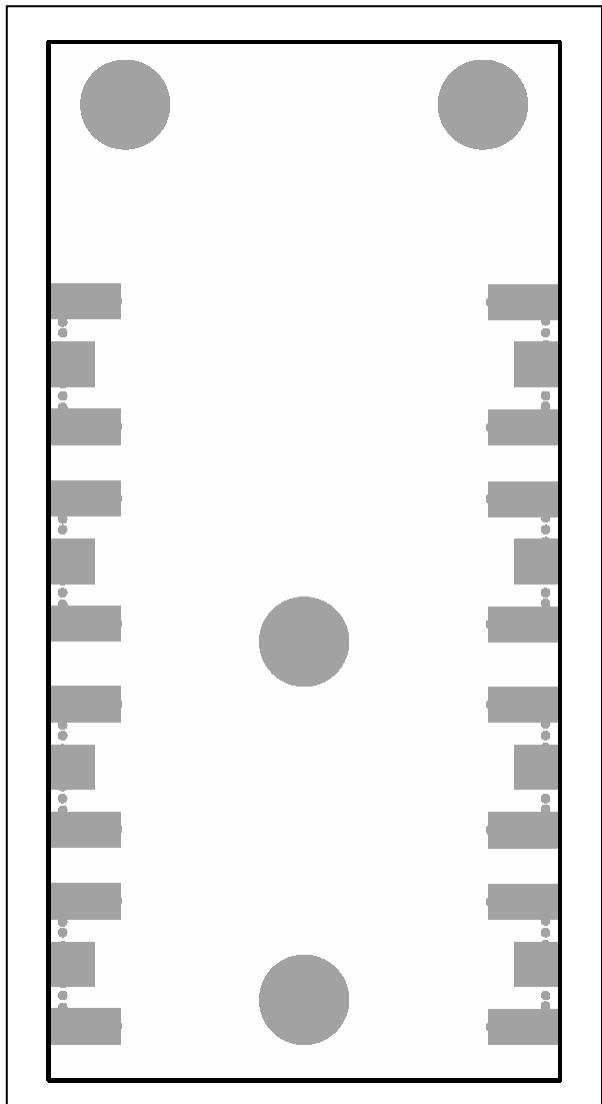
MAX3787 EV Kit PC Board Layout—Solder Side
